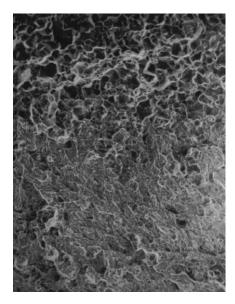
IGF + TGH fracture, zoom: 105x [1]
